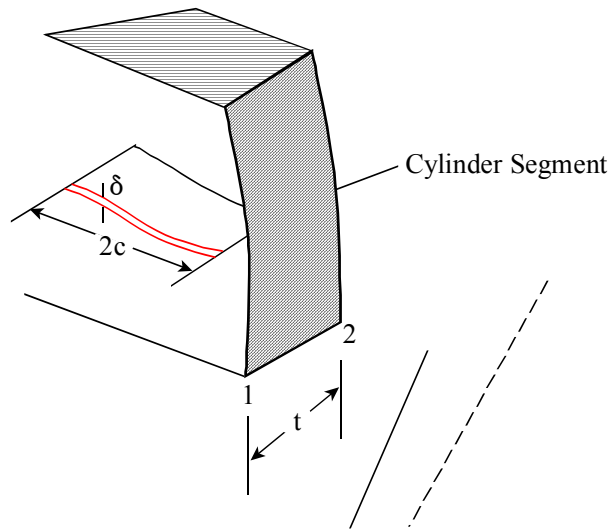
Schematic of Opening Displacement of Through Wall Crack in Cylinder
